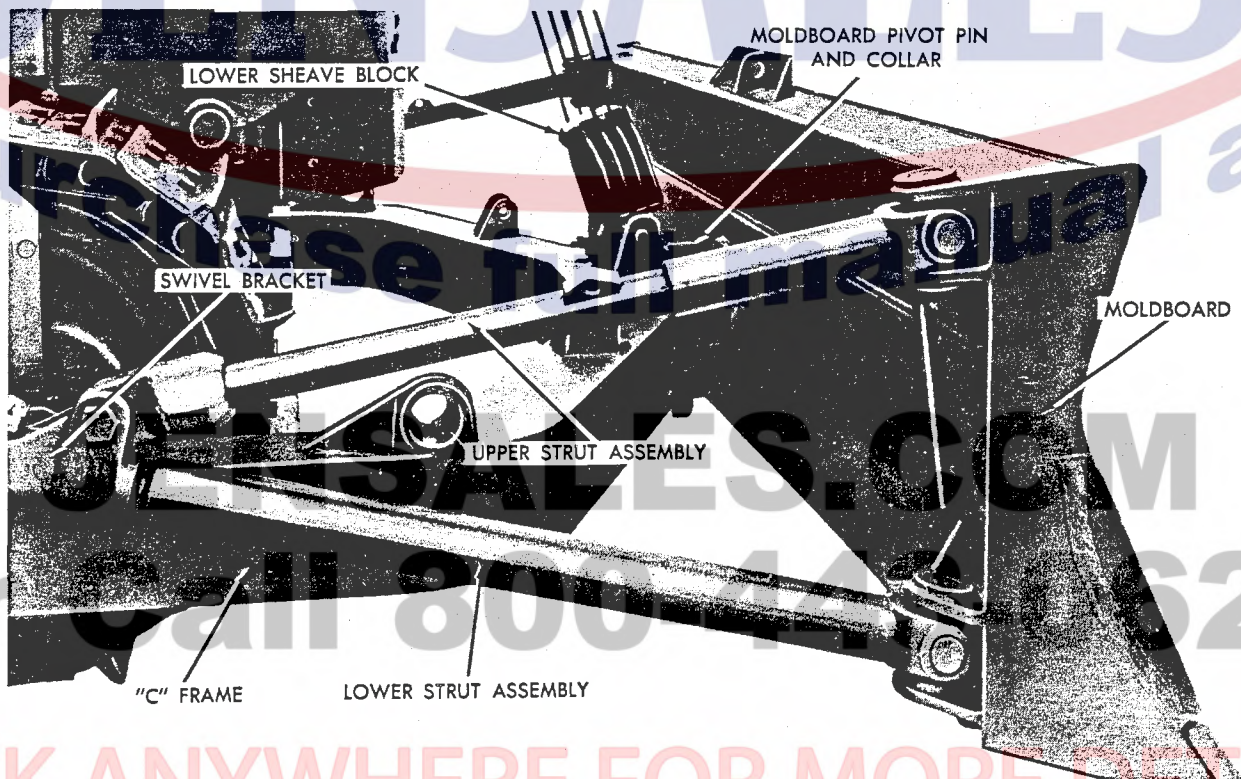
Typical Model CA (Cable Angle) Dozer (T-19341)
